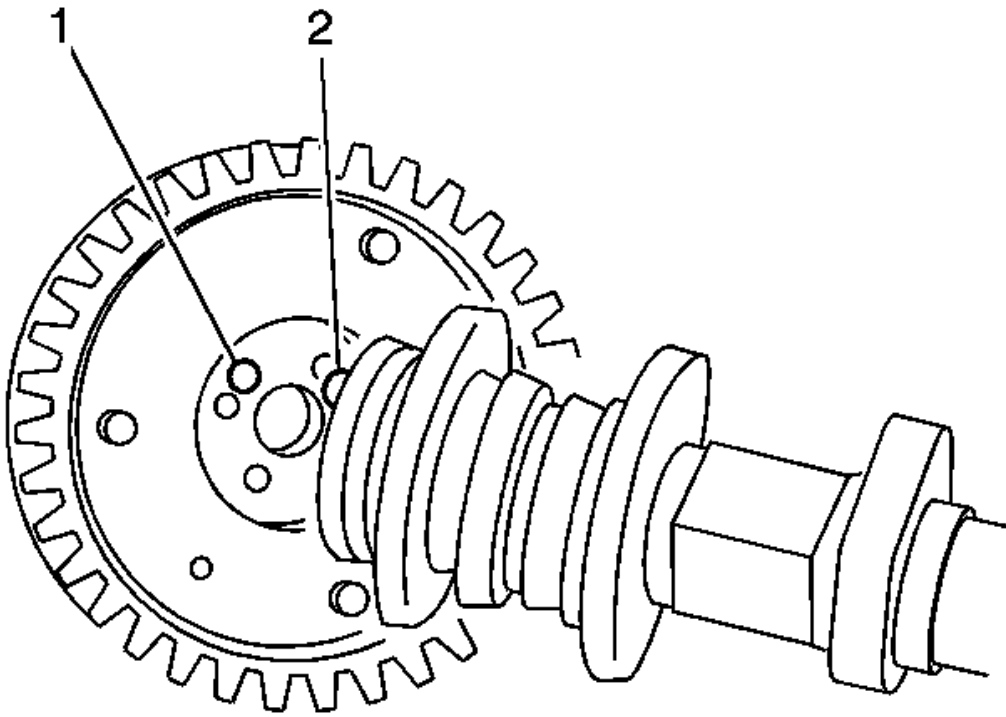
View Of Camshaft Timing Exhaust Gear & Camshaft
